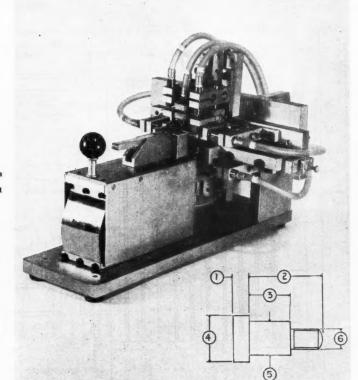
Example of small universal inspection fixture using 97% standard parts to inspect part shown in sketch.
